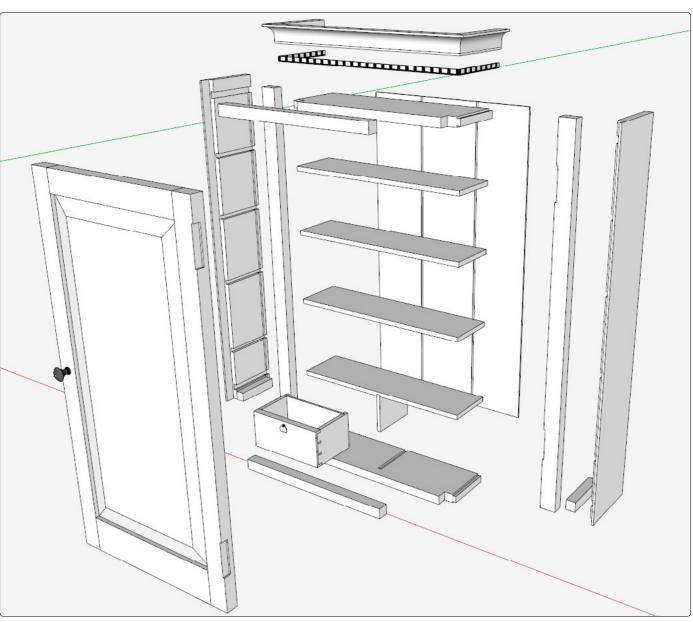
Exploded view of the wall cabinet, showing the sliding dovetail joints and other case joinery. You can also see the decorative band at the top of the piece.
